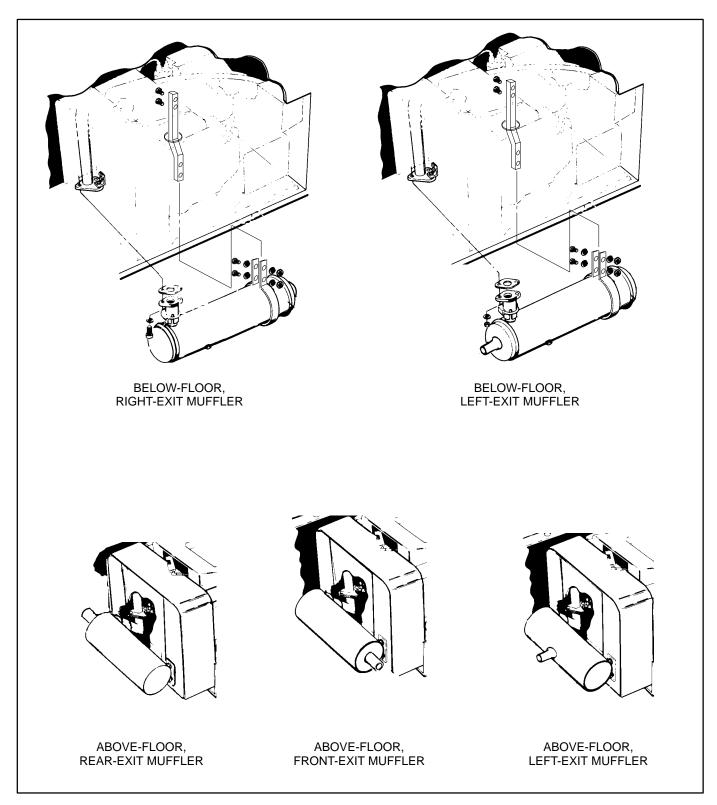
BELOW-FLOOR AND ABOVE-FLOOR MUFFLERS
